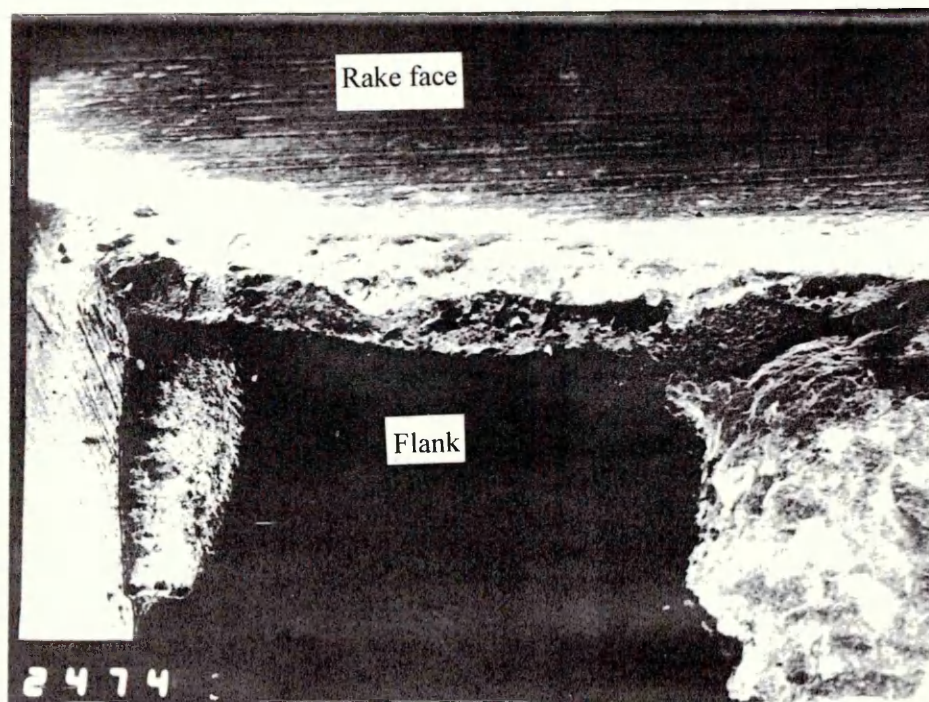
(d) The large chipping and breakage produced on the cutting edge of the TiAlN coated A1 in case of cutting 302S25 stainless steel.
